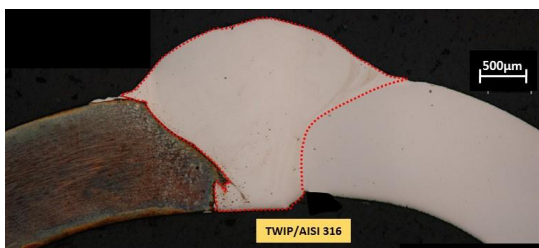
Joint TWIP/ AISI 316 cross section after bending.
